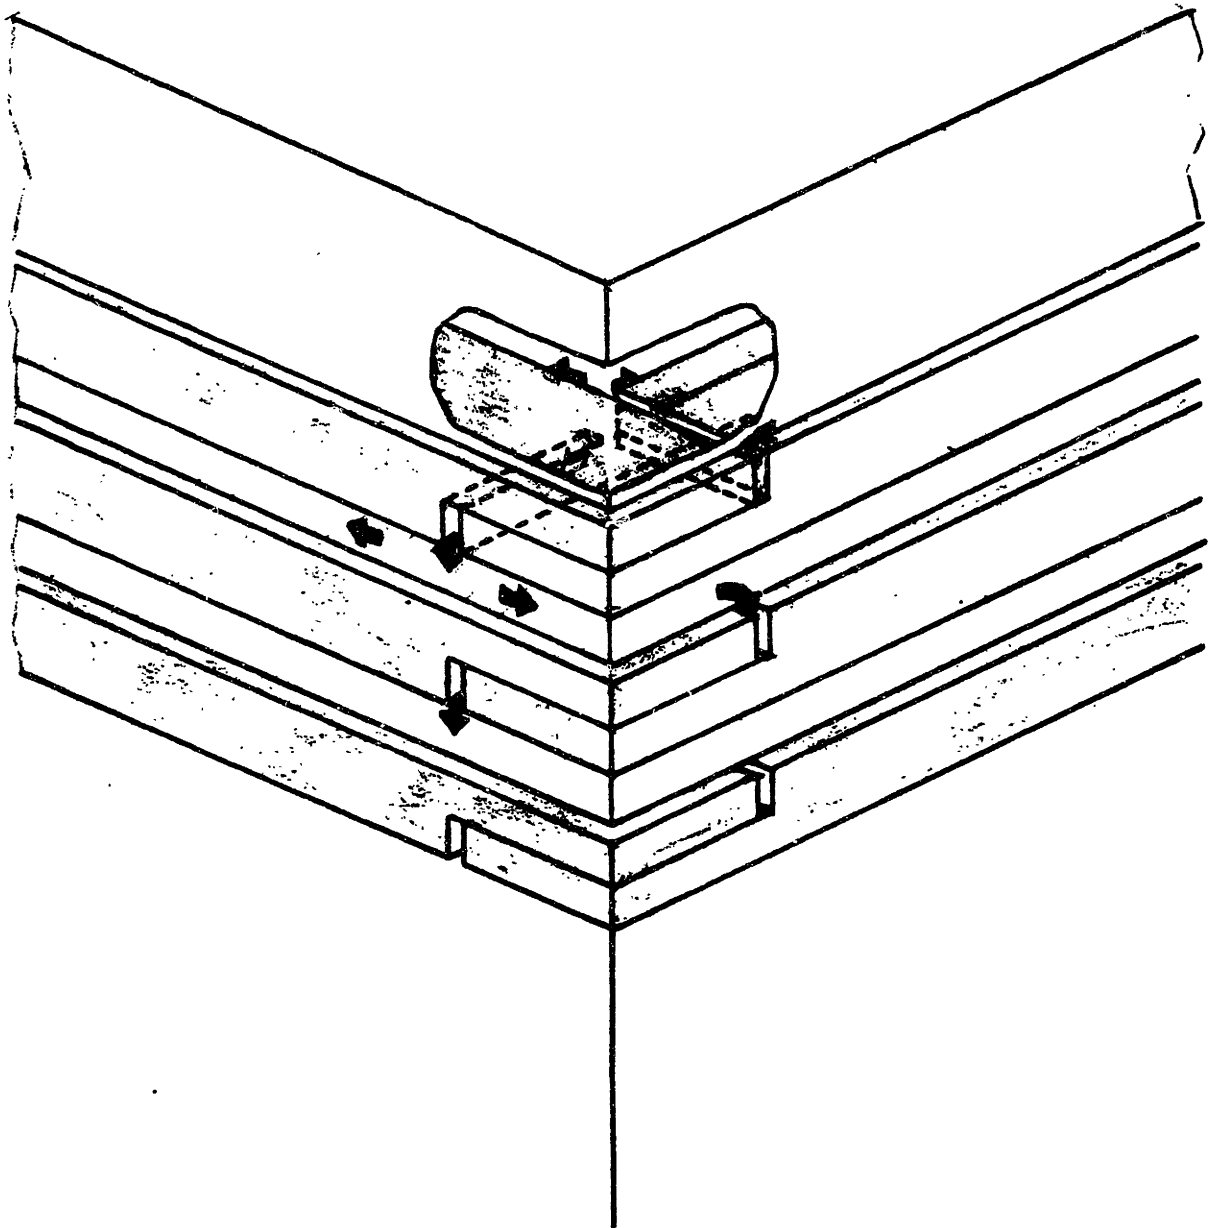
Piston ring assembly showing the passages through which the gas flows in and out of the regions behind and between the rings.
